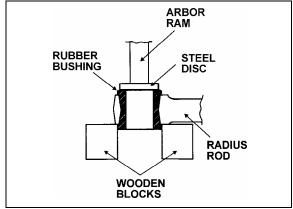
RADIUS ROD BUSHING REMOVAL
